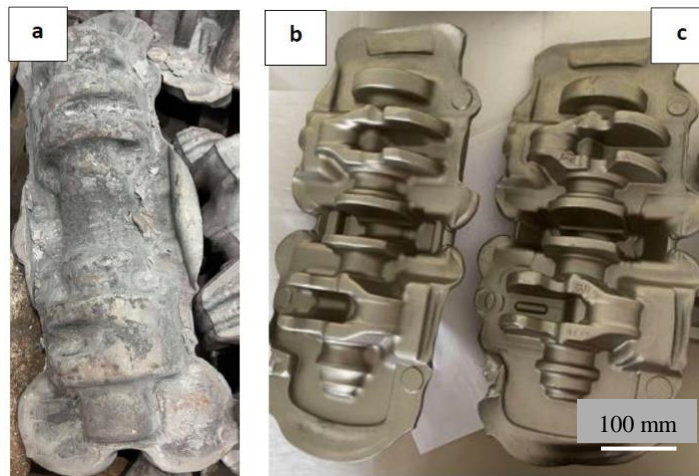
Pieces obtained after hot forging steps: a) after distribution, b) after roughing, c) after finishing.
